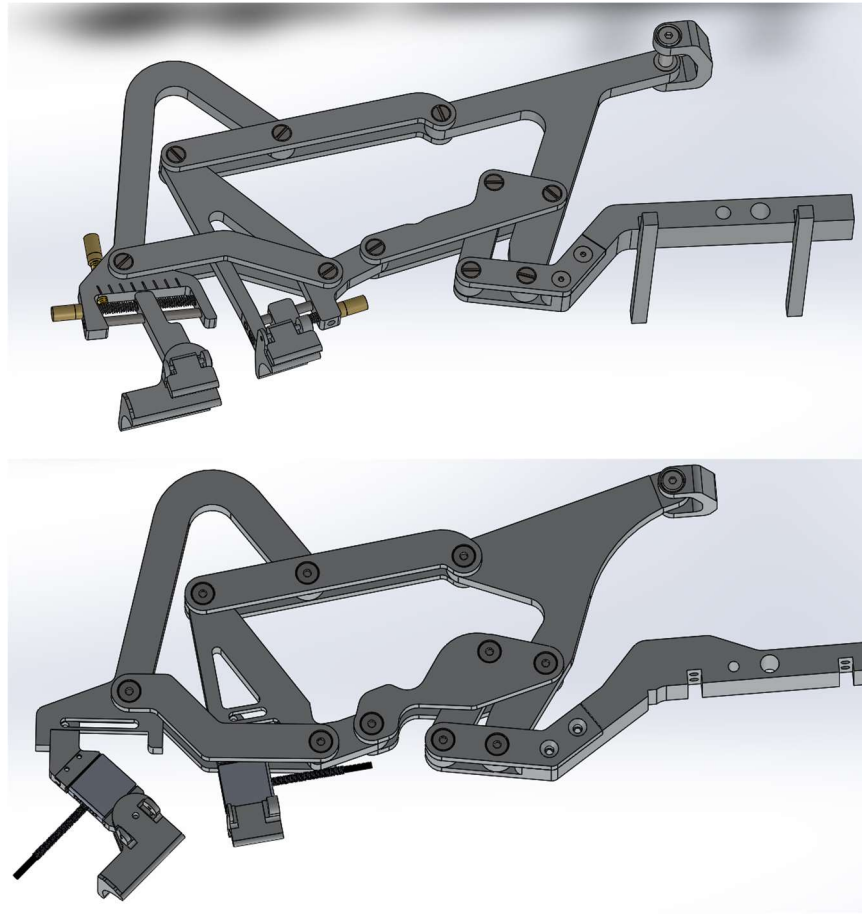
The original mechanism (Top) and the modified mechanism (bottom). The modified mechanism has larger bearings and wider links and has been modified to include load cells.
